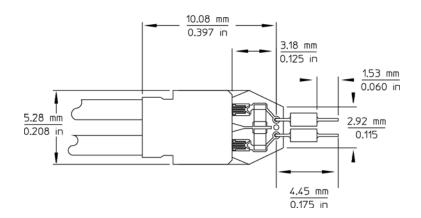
01131-62103 Solder-in Differential Probe Head Dimensions
